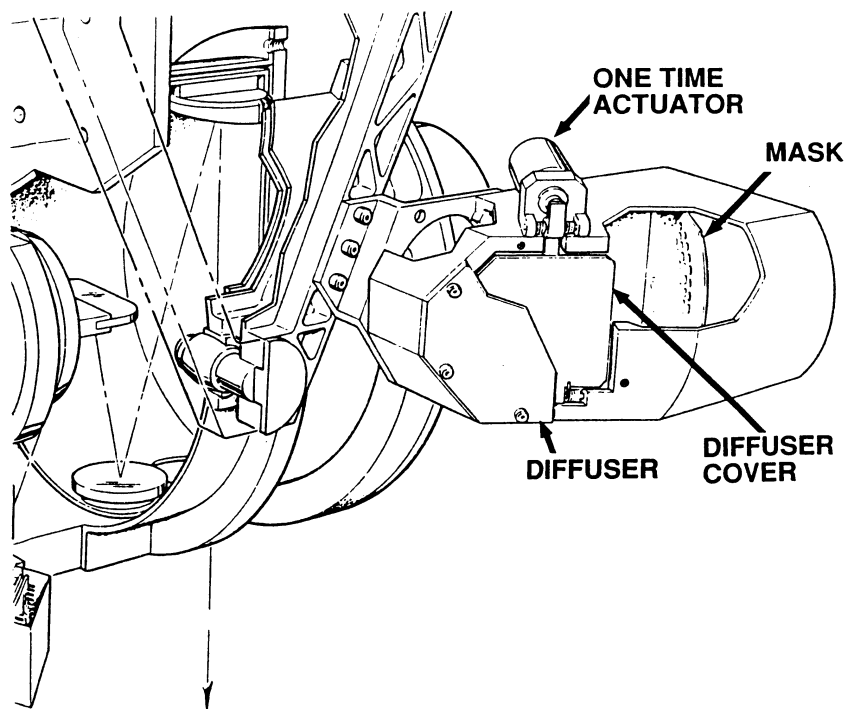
This figure shows a detailed view of the diffuser assembly. The diffuser is painted on the inside of the diffuser housing, behind the diffuser cover. When the solenoid is actuated, the diffuser cover rotates into the drawing and lies on the bottom of the diffuser housing. The diffuser cover is also painted to create a second diffuser.
